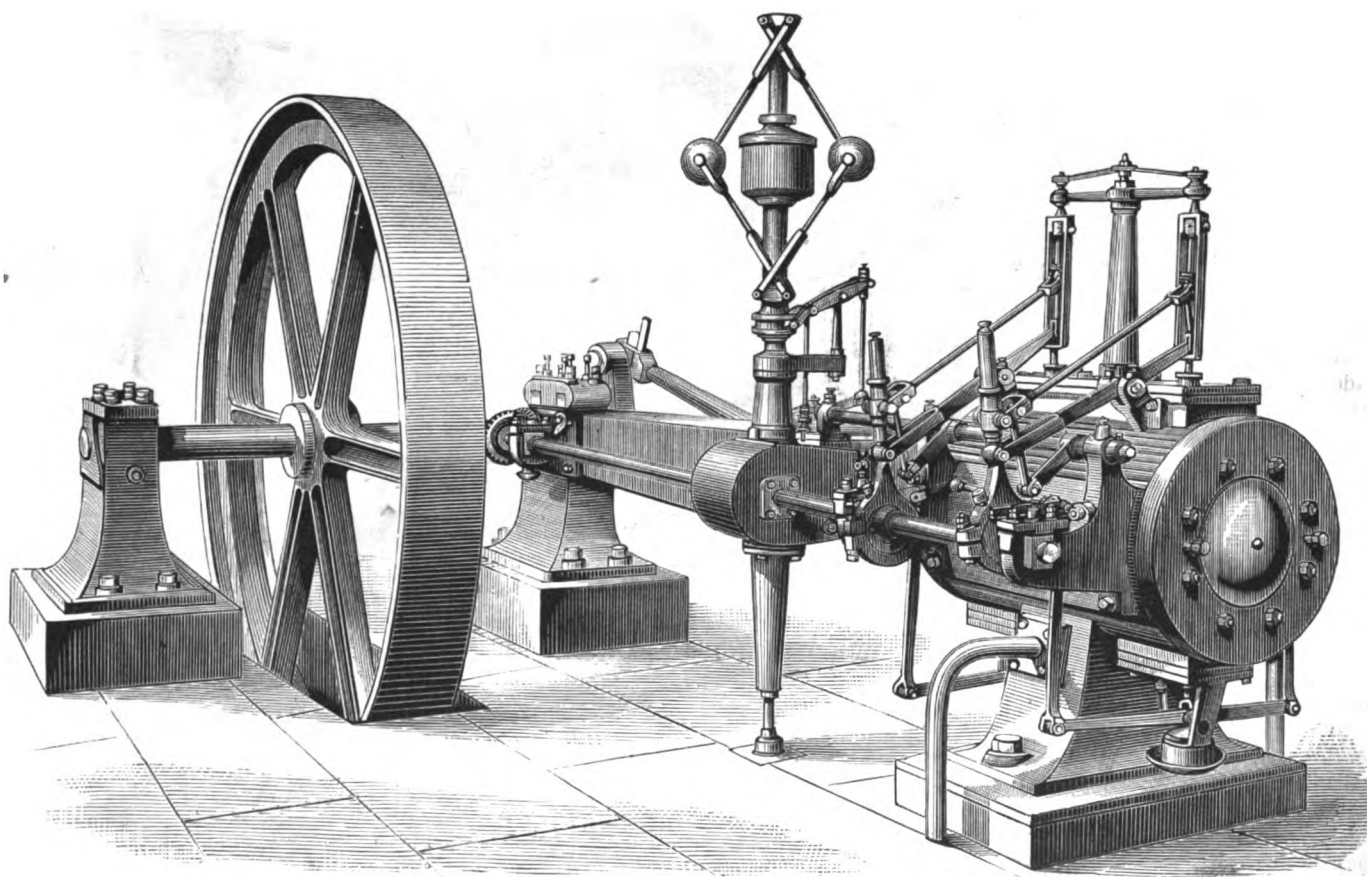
HORIZONTAL ENGINE WITH COLLMANN'S VALVE GEAR.
